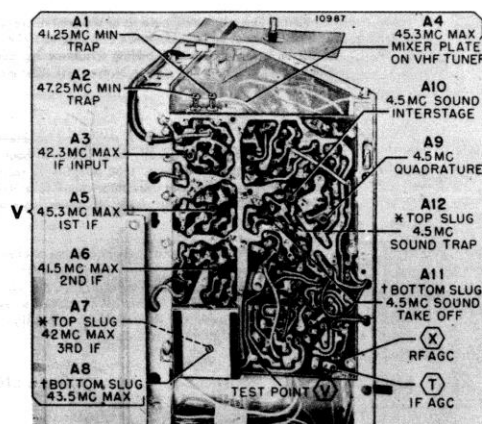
Inside Chassis View of Printed Wiring Board Showing Test Point Locations and IF Alignment Data.
